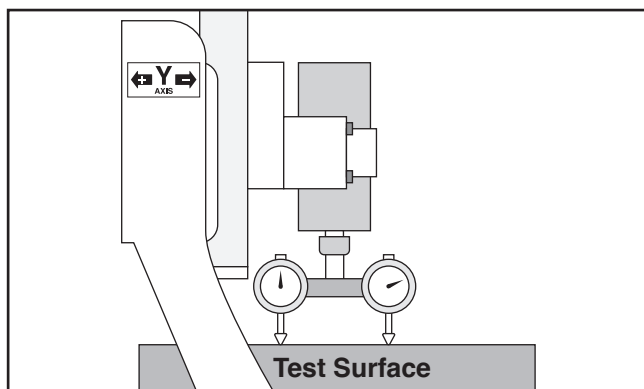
Example of tramping tool rotated 90° to measure Y-axis.
